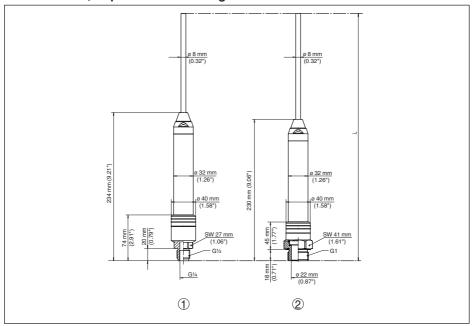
VEGAWELL 52, with threaded fitting and transmitter Duplex
